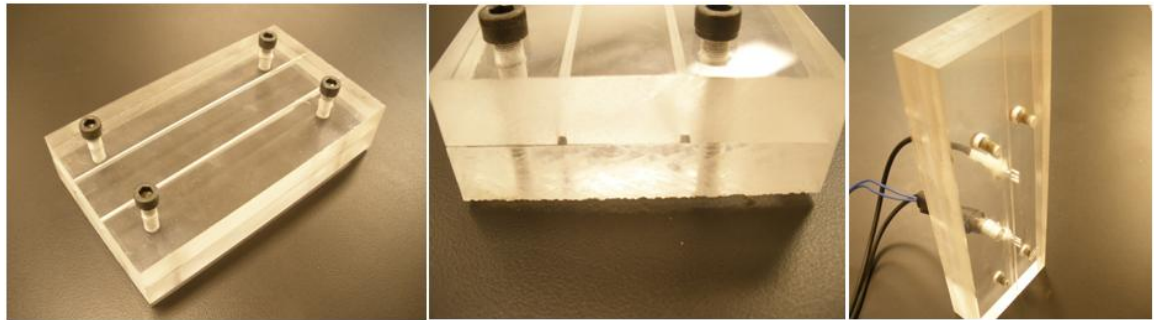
Photograph of subtractive CNC machining practices employed in manufacturing of all MTAs within this work.
